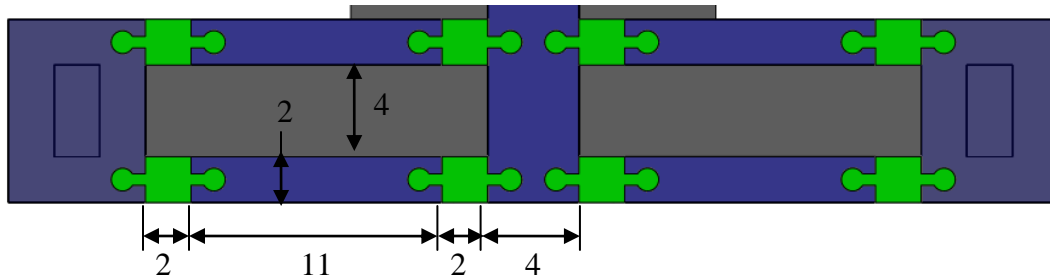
Dimensions of the Combined Parallel Guiding Mechanism
